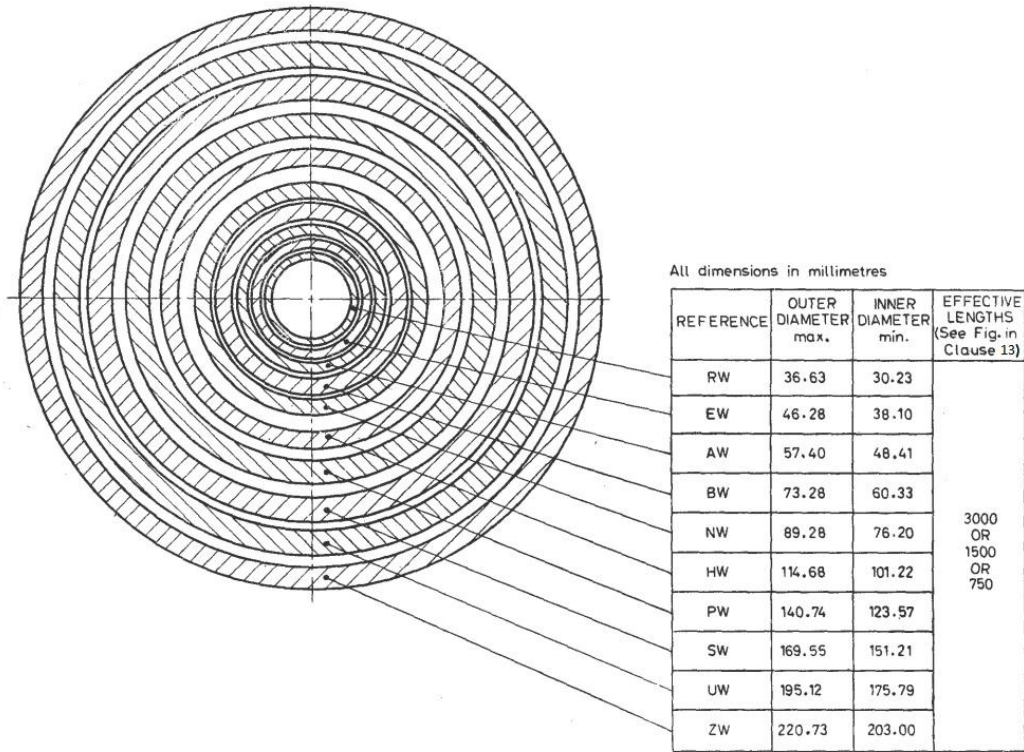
'W' DESIGN FLUSH JOINTED CASINGS
